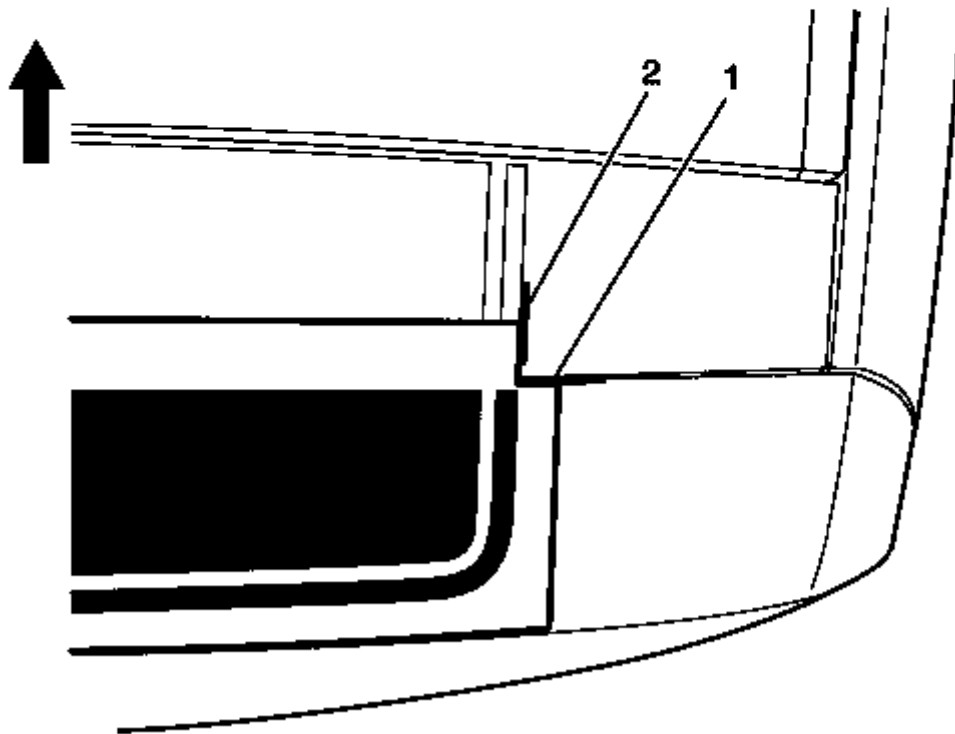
Liftgate Stripe And Spoiler Panel Edge
